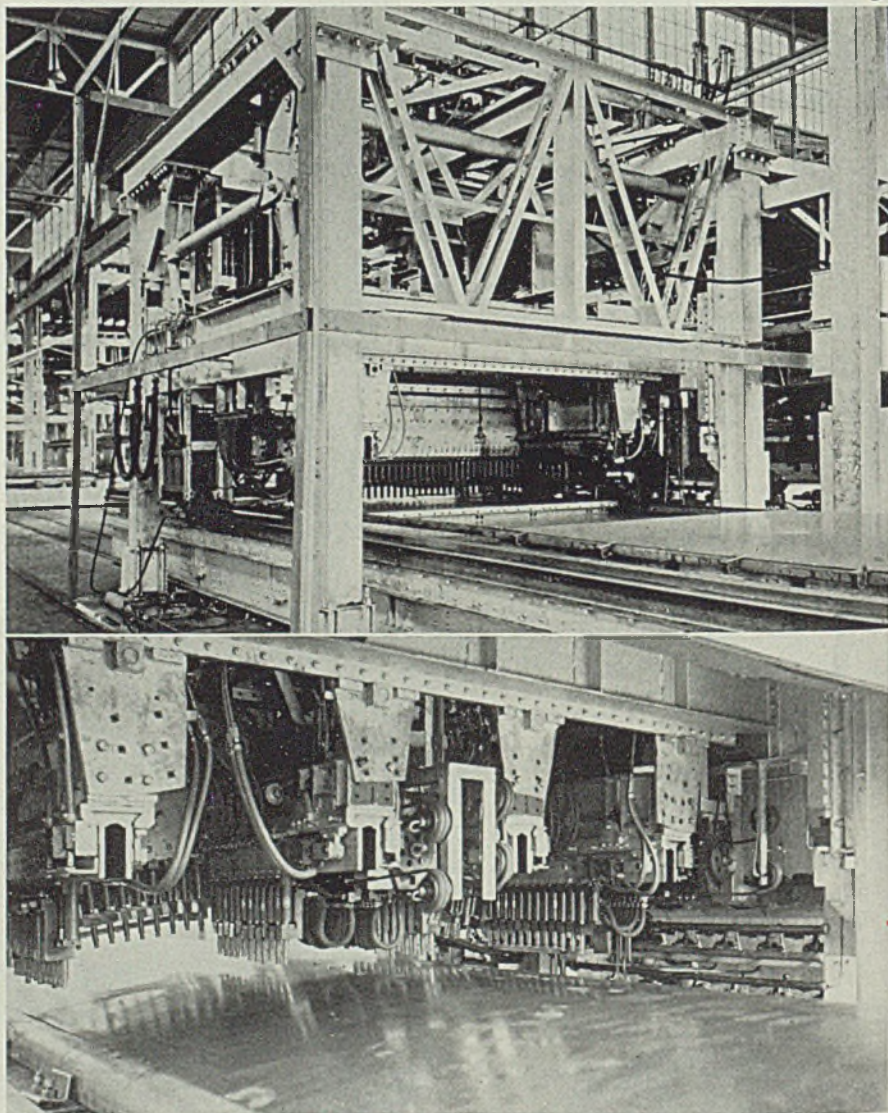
Welder for automatically spot welding car sides: Note various linkages in welder superstructure to permit vertical movement and the horizontal shift. The sequence panel for setting up the automatic welding cycle is shown in the center overhead (top view)
